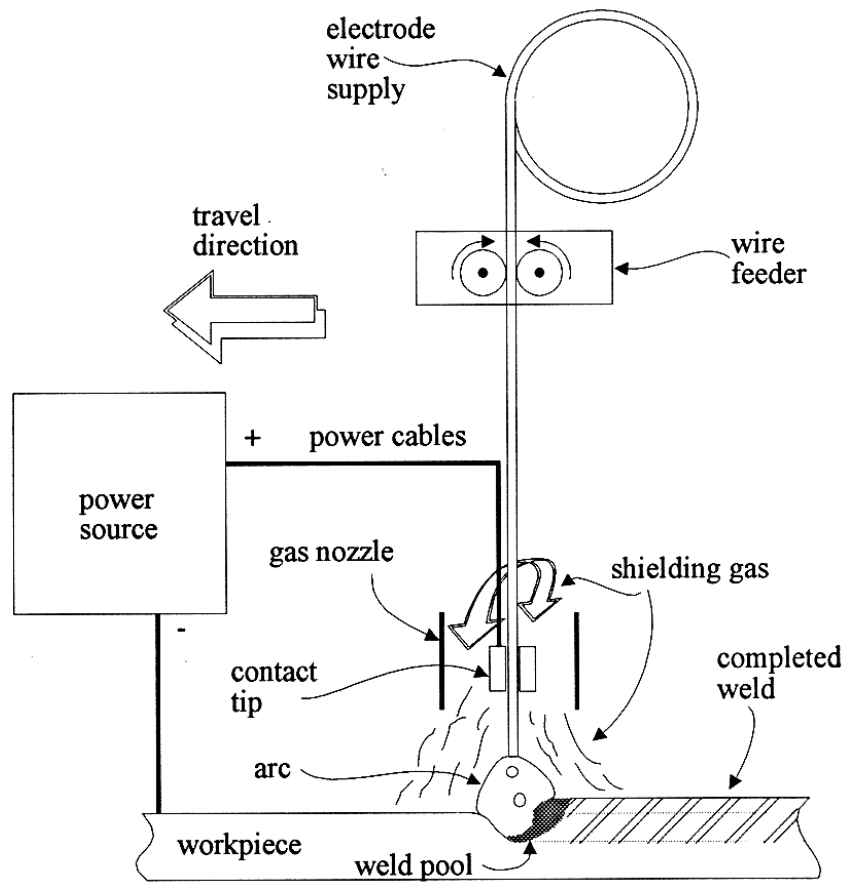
Schematic of a typical GMA welding system.[10]
